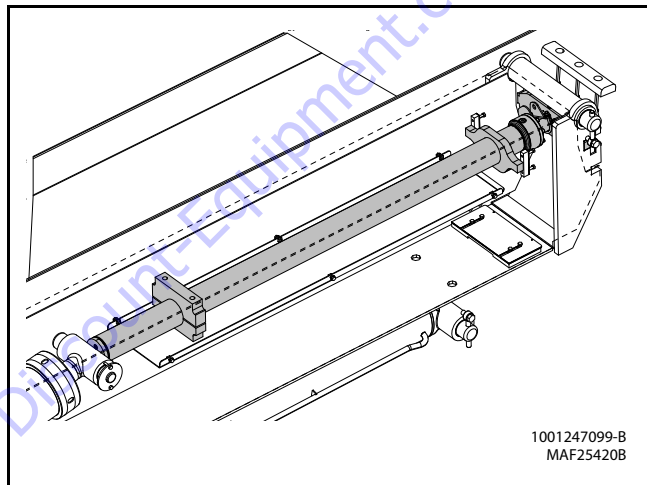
Removal/Installation of Tower Telescope Cylinder
